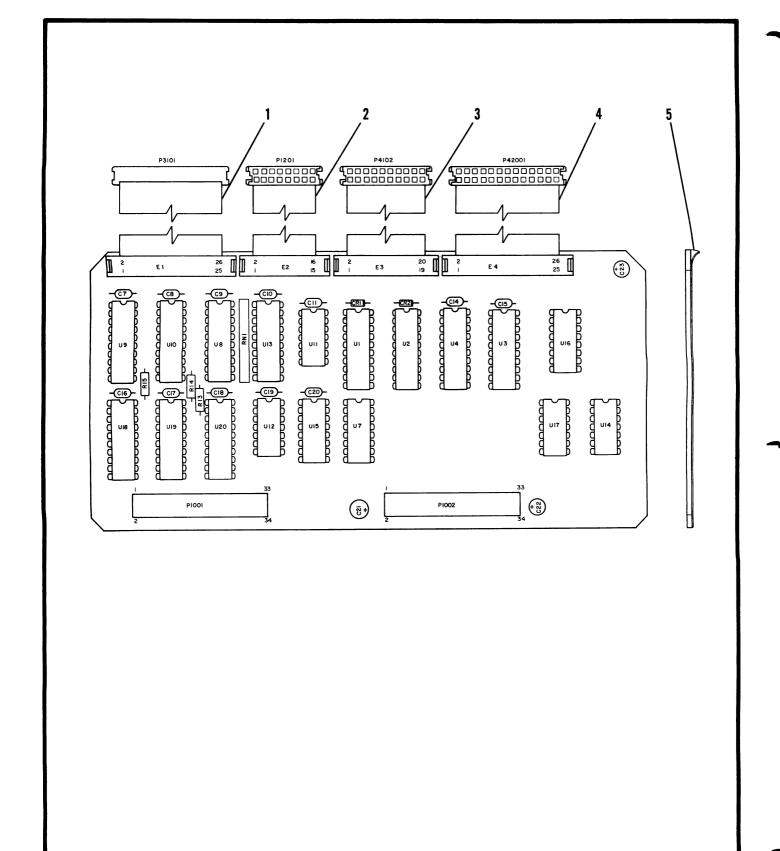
INTERFACE PC BOARD ASSEMBLY
